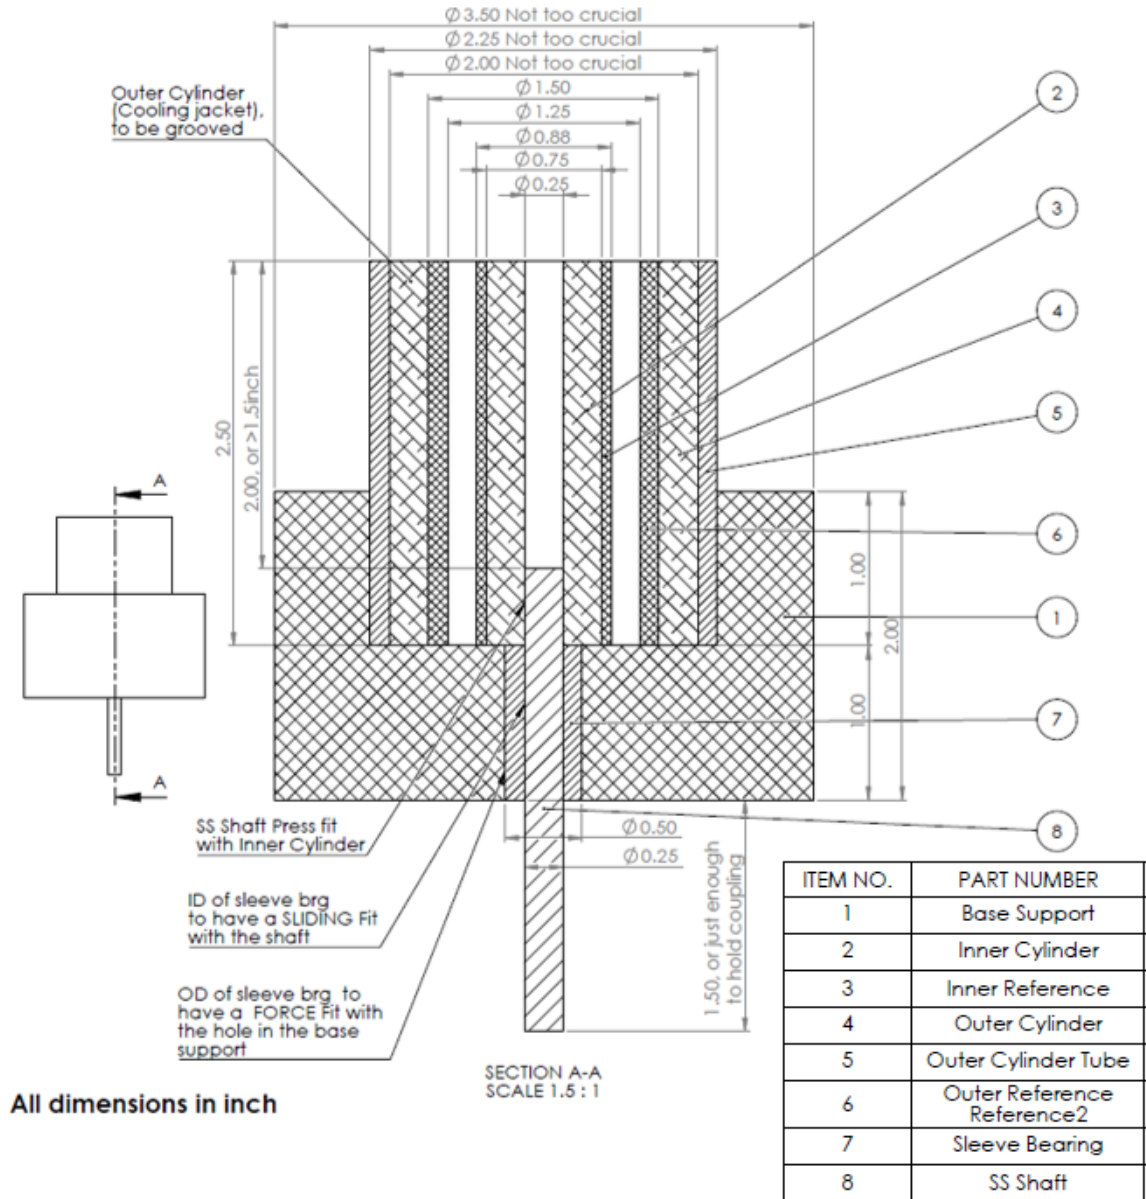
A cross sectional view of the assembly of the first version of the Couette Cell with a shorter base support, with all parts enlisted, and the type of fits of crucial components.
